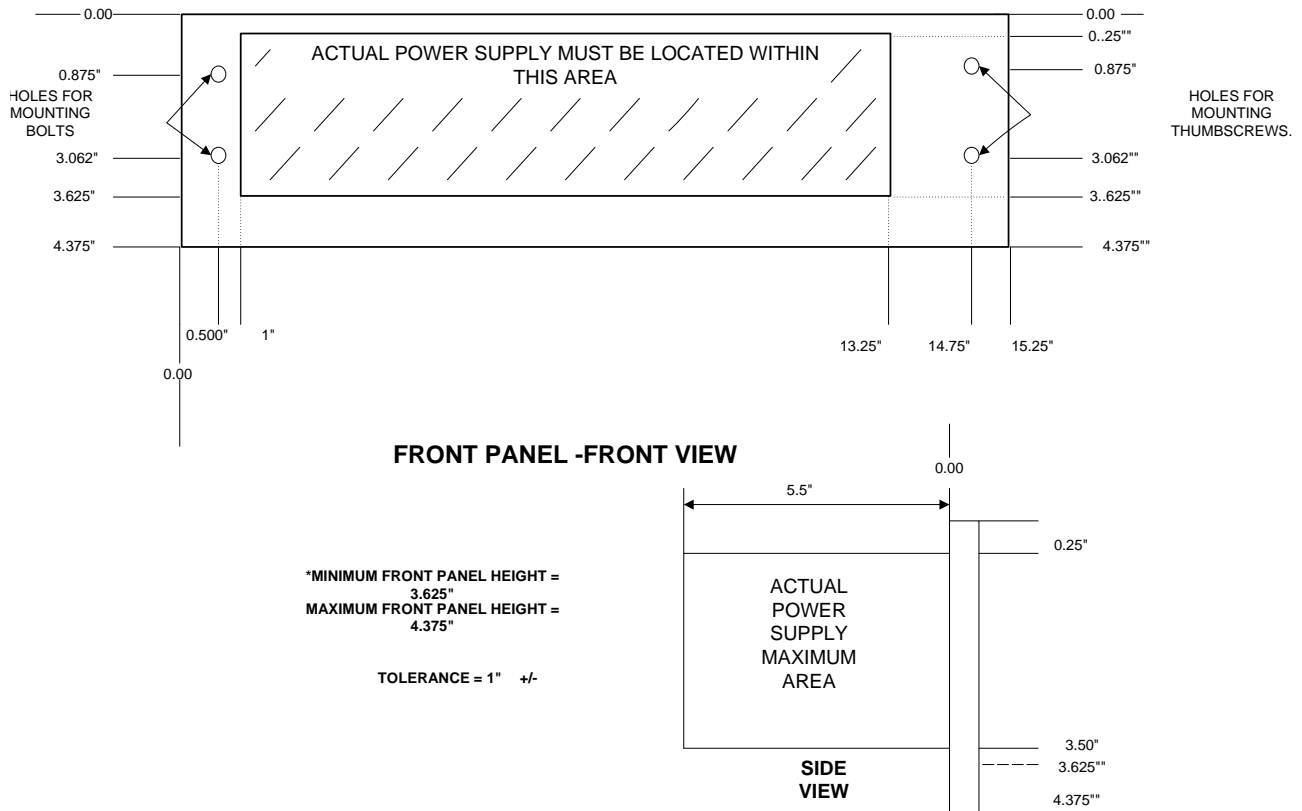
Cabinet Bolt Hole Locations and Channel Mounting Bracket details
